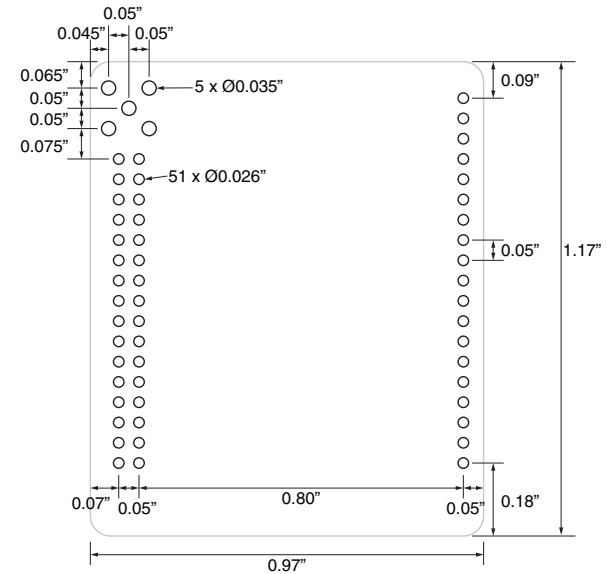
EVM-fff-PRC PCB Layout Dimensions
